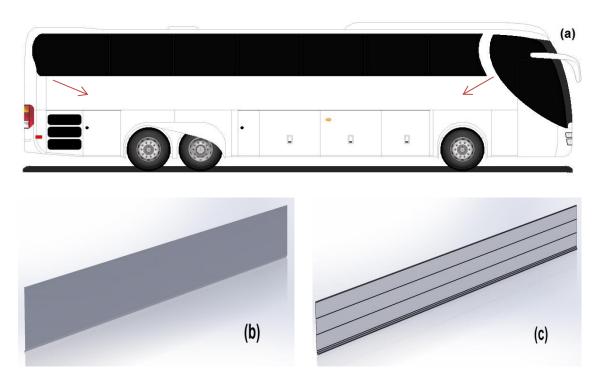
The body component fixed on a coach (a), Solidworks drawing of the component (b) front and (c) back.
